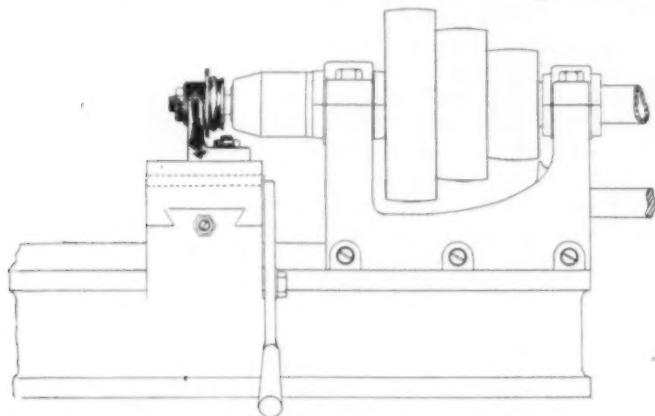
CIRCULAR FORMING TOOL IN POSITION ON CROSS SLIDE OF MACHINE. FRONT VIEW.
